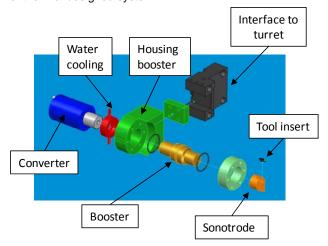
Exploded view of the designed ultrasonic tool holder system.
